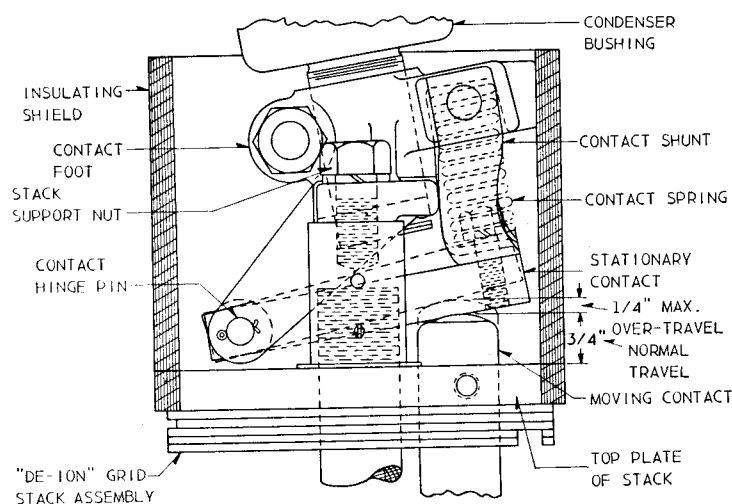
BUTT TYPE CONTACT ASSEMBLY
